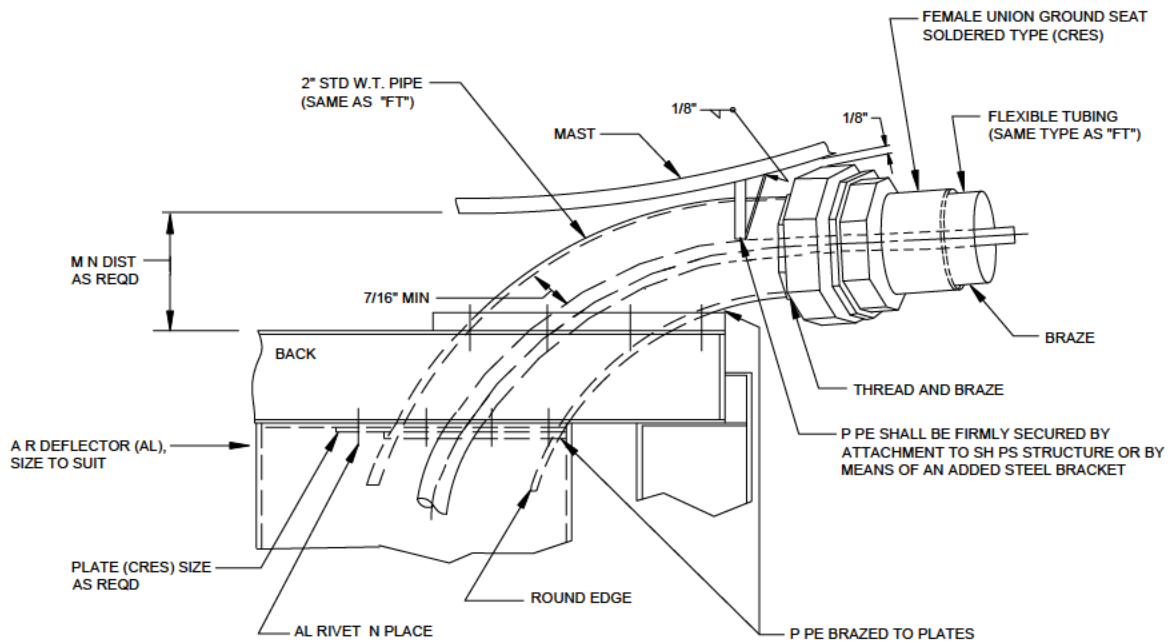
D24. Protection of cables on mast (surface ships) – detail “CT”.
